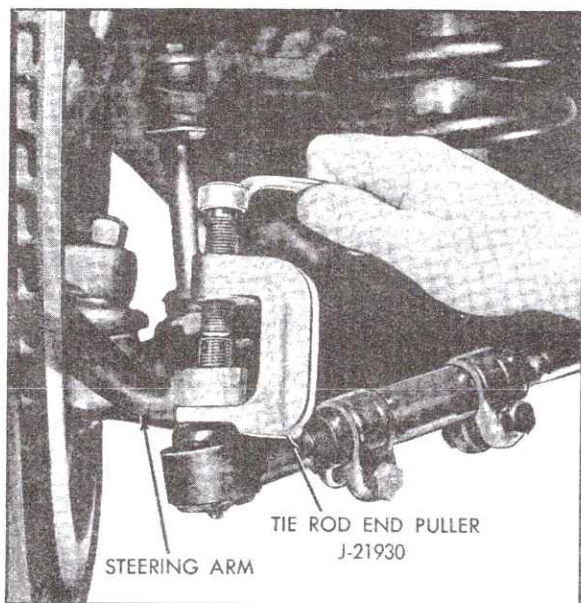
Removing Tie Rod Joint Stud from Steering Arm
